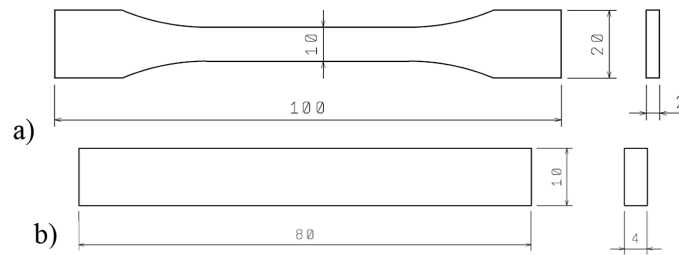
Dimensions of specimens for experimental strength tests: a) tensile test, b) bending test
